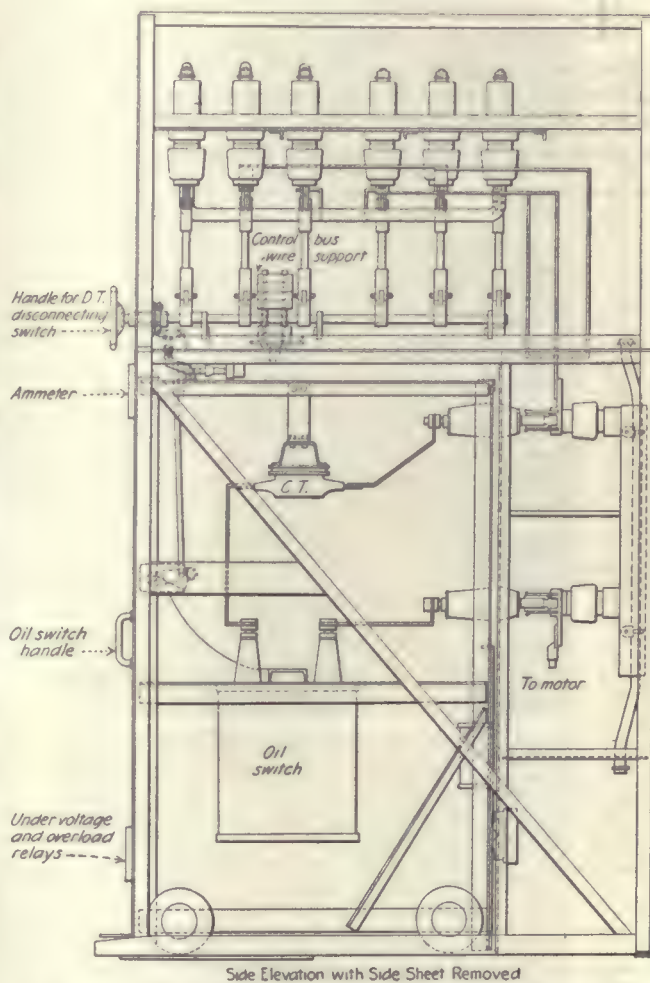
TYPICAL STEEL COMPARTMENT CONTROLLING LARGE 2,300-VOLT SQUIRREL-CAGE MOTOR OR TRANSFORMER
